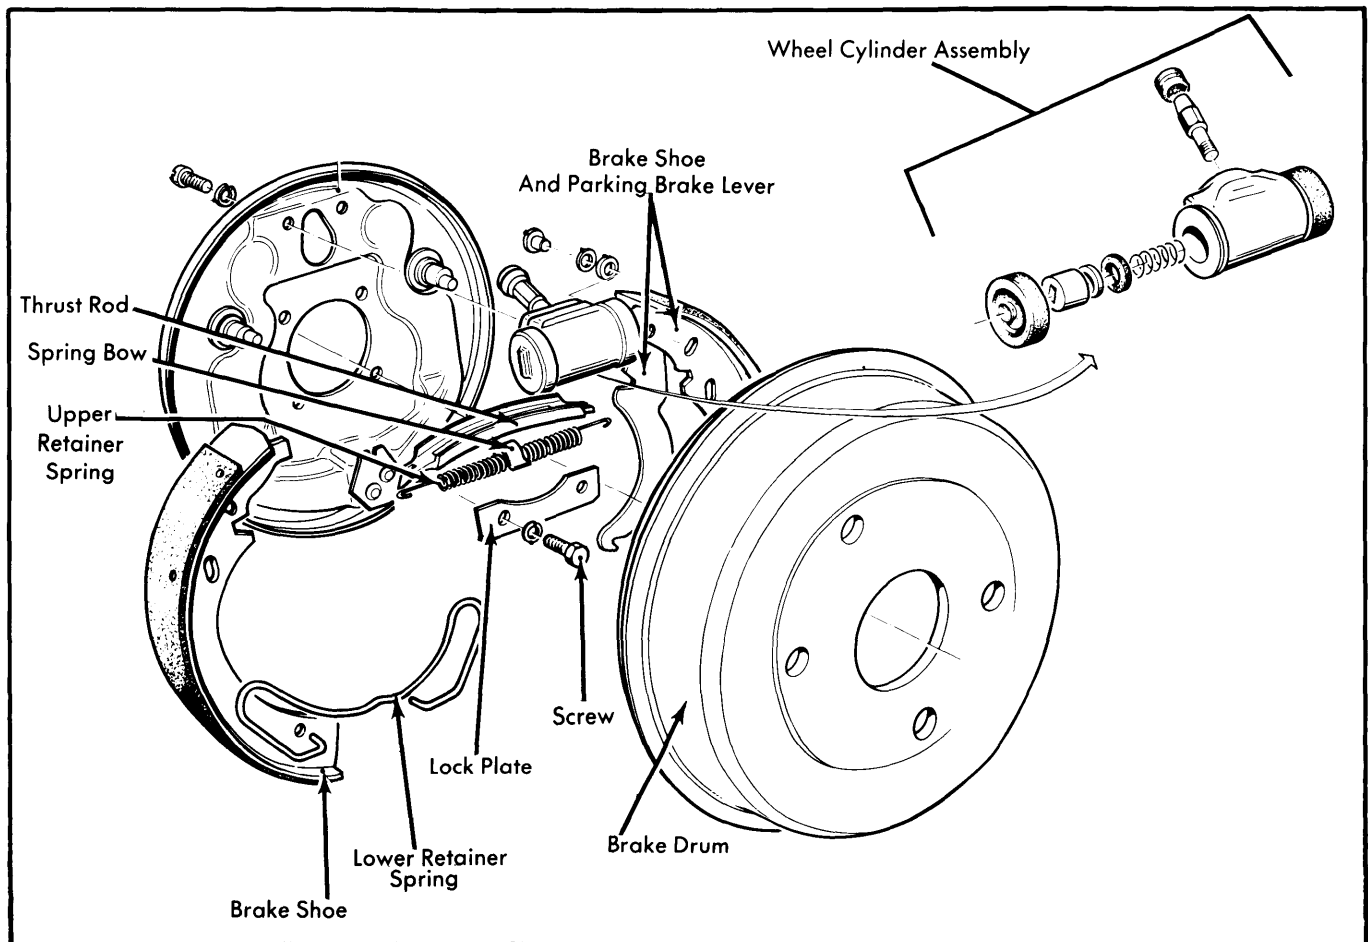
Exploded View of 320 Rear Drum Brake Assy.
